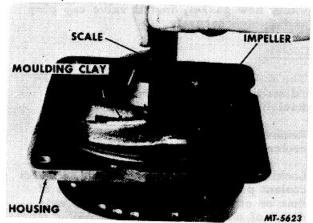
Measuring Thickness of Moulding Clay to Determine Impeller Clearance
